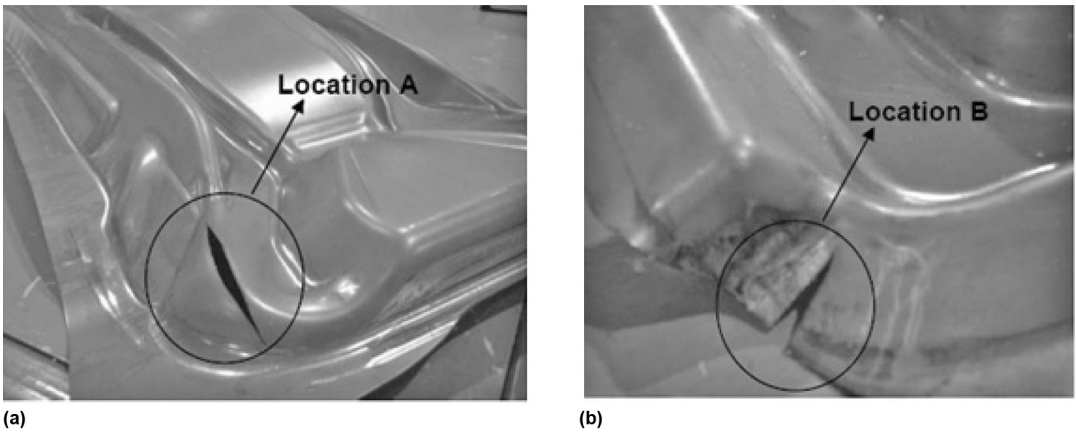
Examples of DP 600 sheet fractured during (a) bending and (b) bending and stretching
